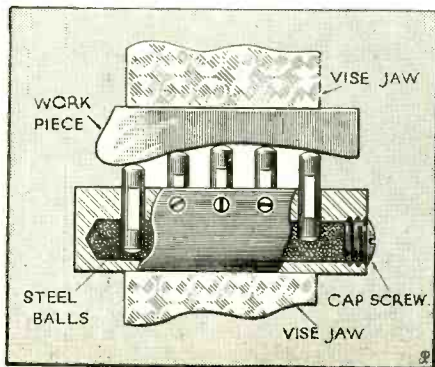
With this device, odd-shaped pieces can be firmly held in the vise.
